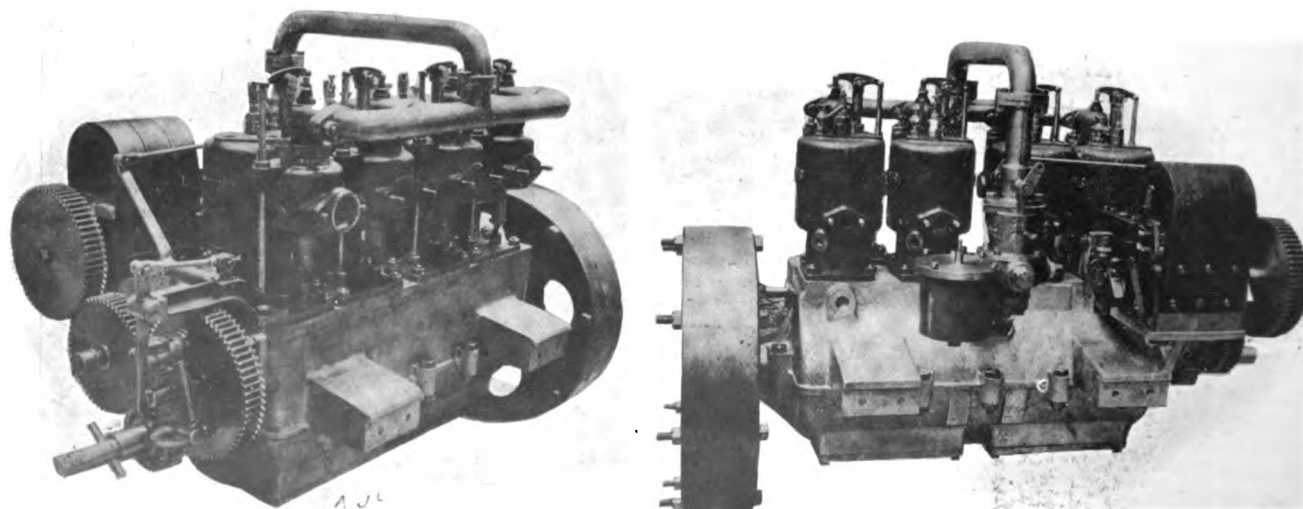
The 12-15-h.p. Simms Engine, showing (on the left) the valve-rods, and (on the right) the carburettor and high-tension magneto. The cover plates over the cam-shaft are detachable, and the top halves of the cam-shaft bearing are held down by springs.
